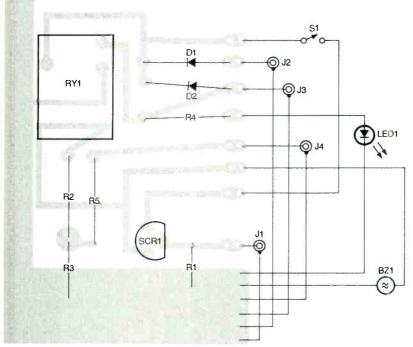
If you want to etch a PC board from the foil pattern, use this placement diagram to locate the parts.
